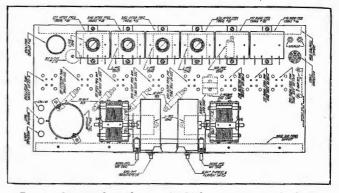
Inasmuch as the panel which accompanies the kit is already stamped and sockets assembled, the builder should have no difficulty in laying out all parts of the super in accordance with the layout diagram shown above
